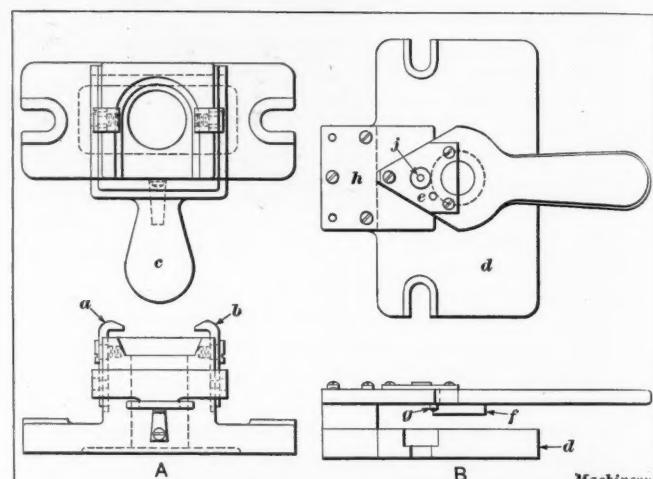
(A) Fixture for holding Fuse Rings while reaming. (B) Jig for drilling Vent Hole in Powder at End of Composition Channel
